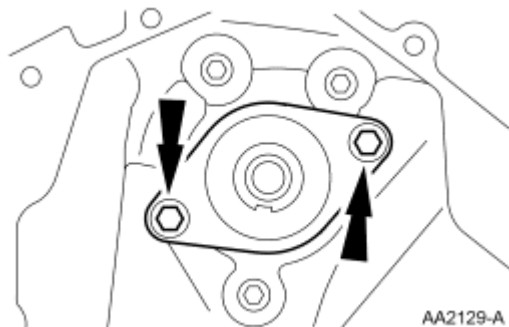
Locating Bolts & Camshaft Thrust Plate
